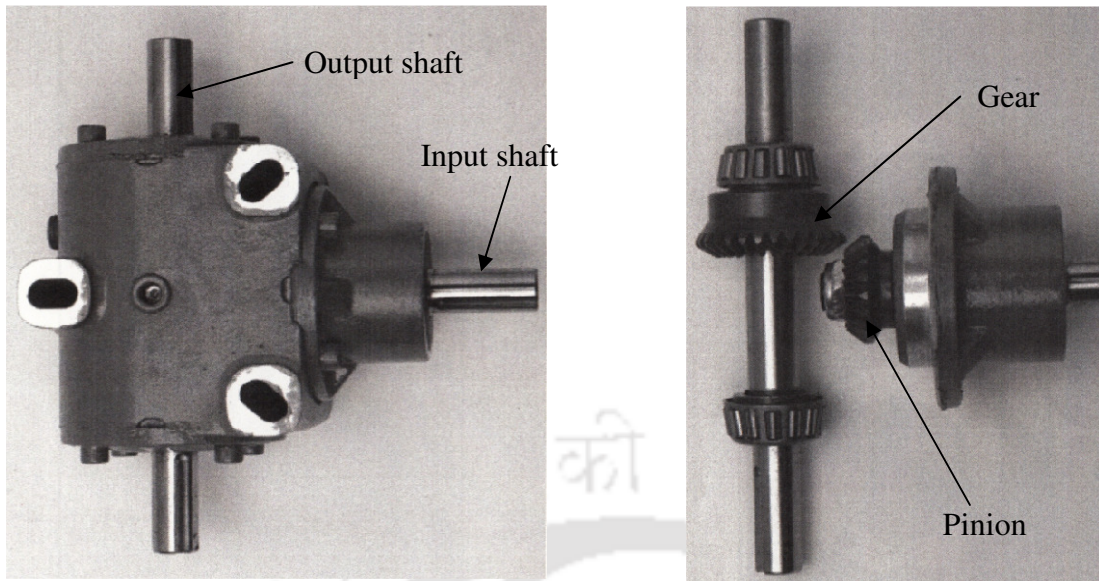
The gearbox and its assembly (left) gear box (right) pinion and gear pair
